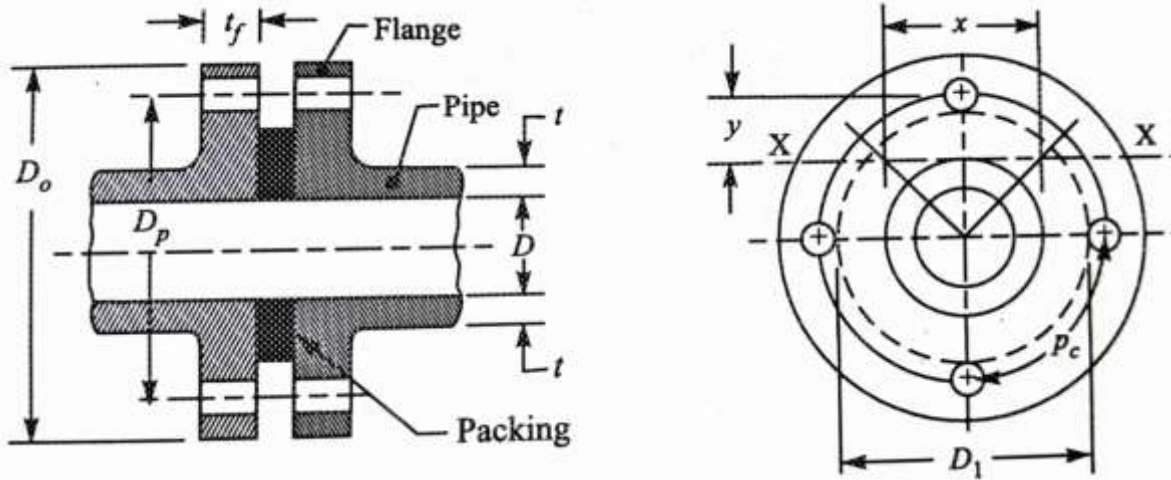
Circular flanged joint showing design parameters (Khurmi and Gupta 2005).
